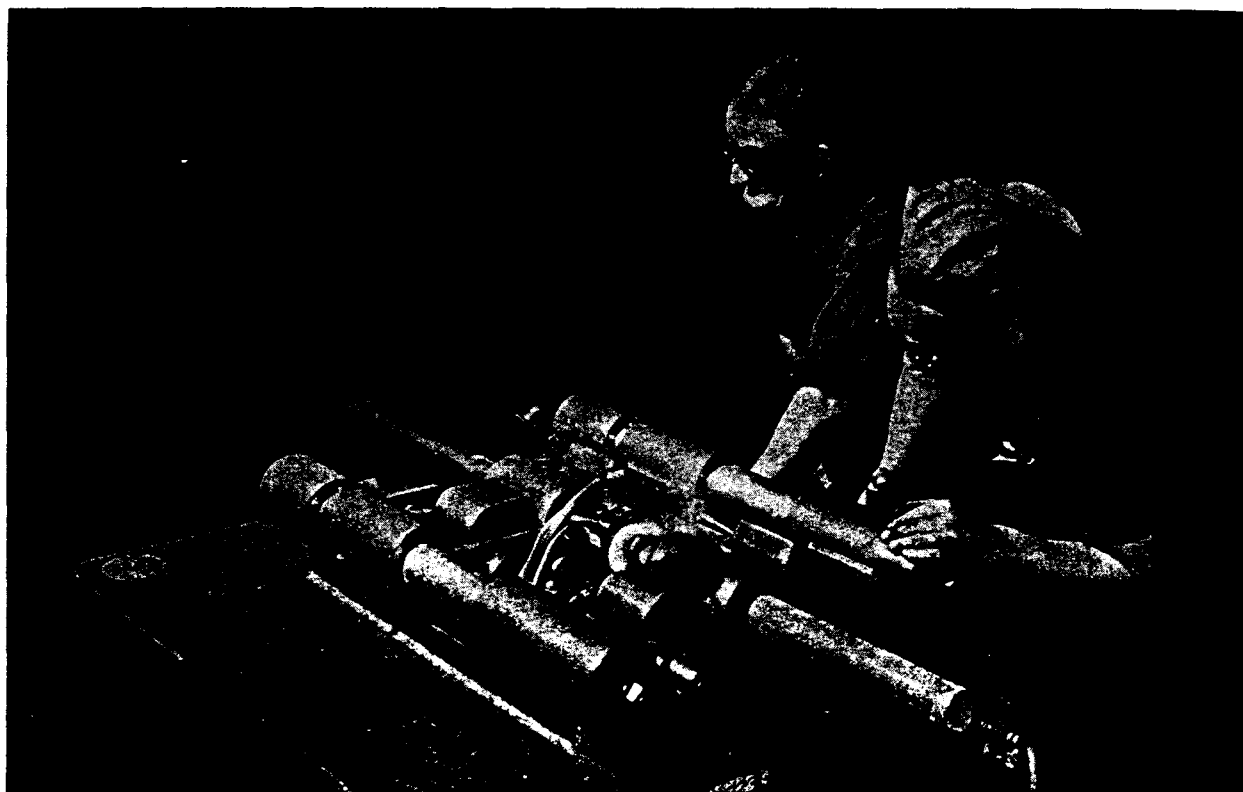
A Small Pressure Gas Welding Machine for Rods and Tubes Up to 3 in. Diameter
